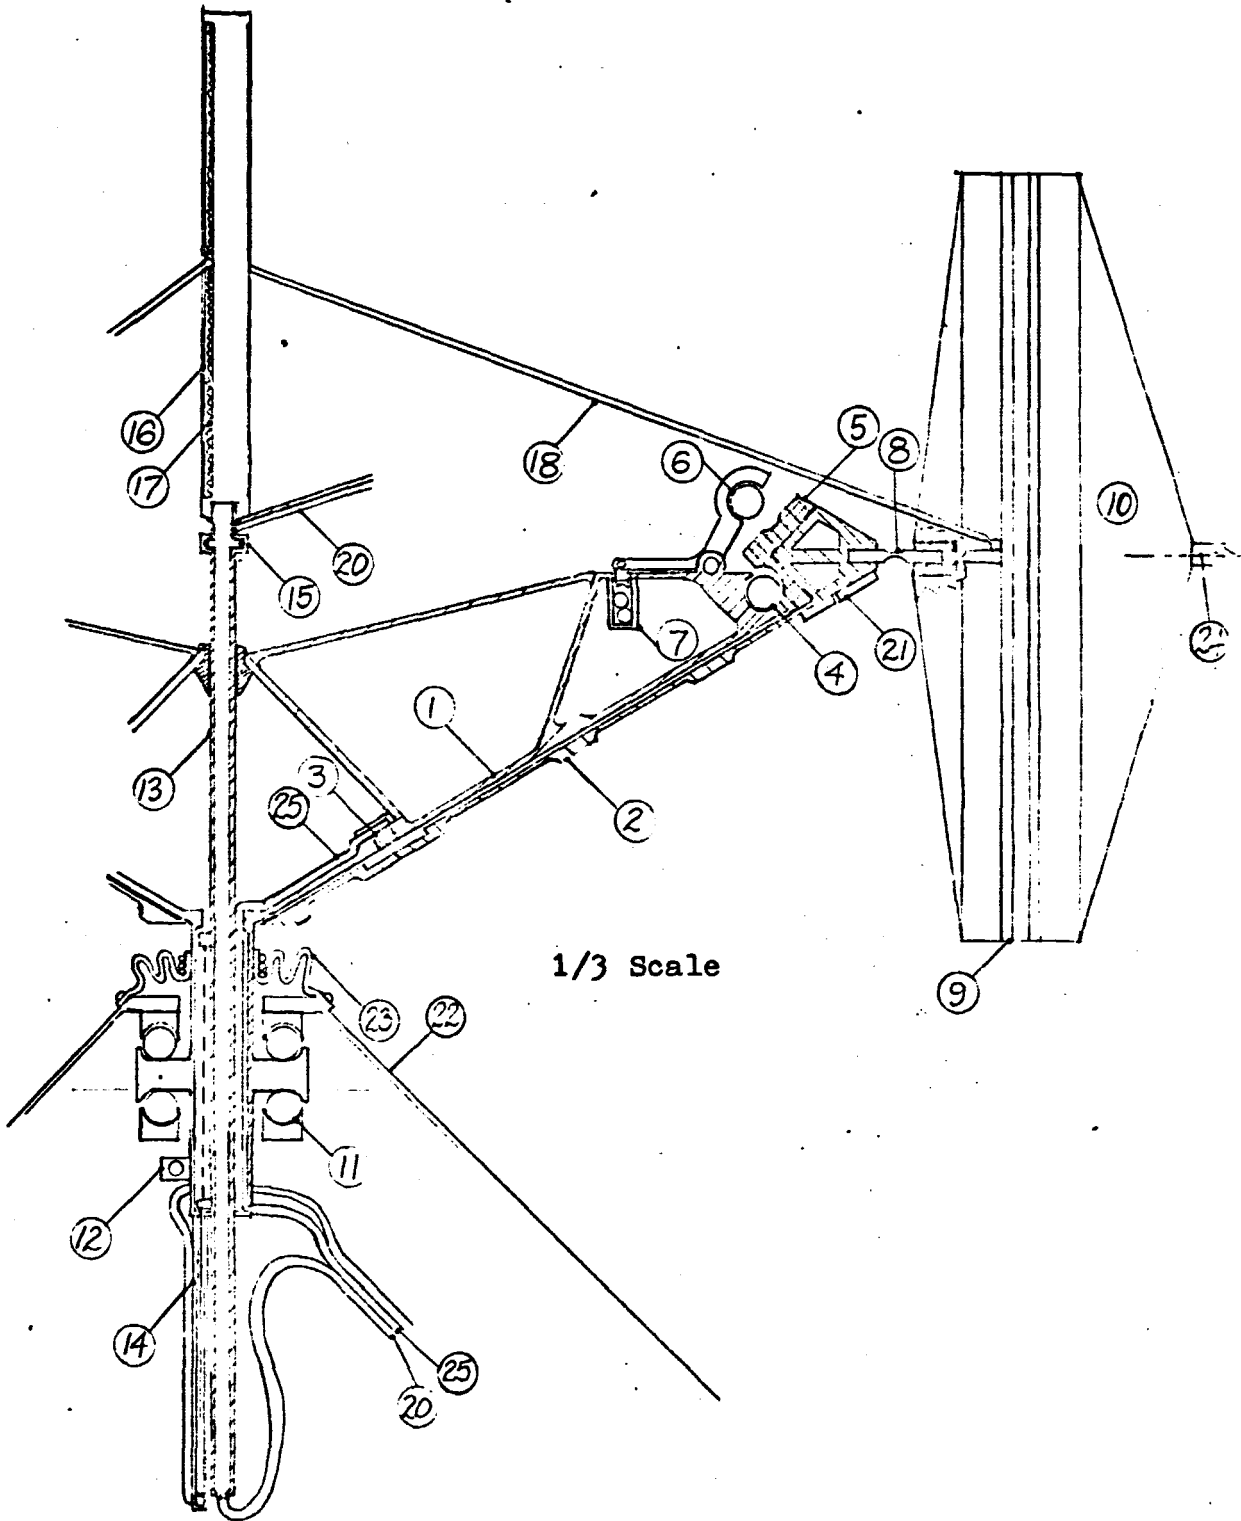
ROTOR-HUB ASSEMBLY - KEY
